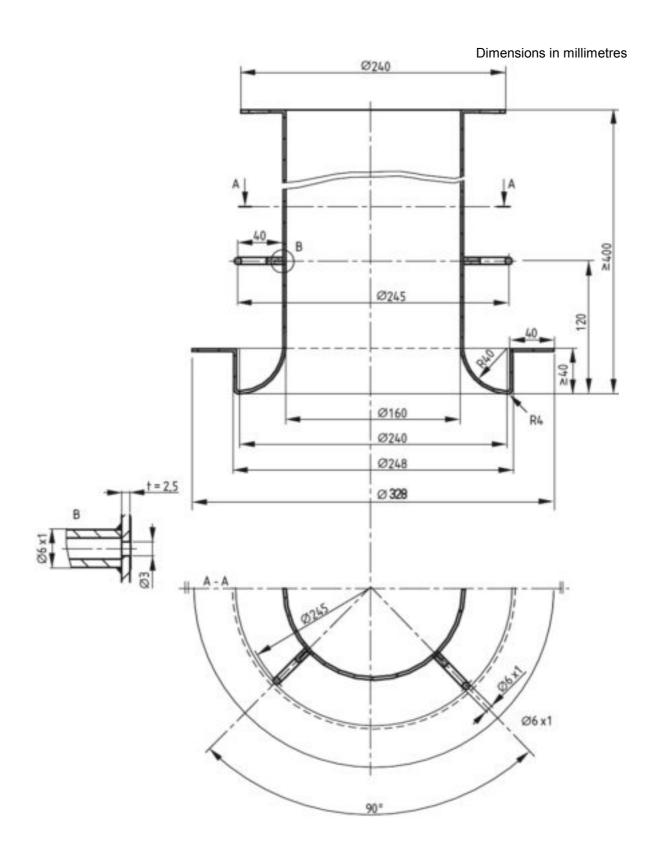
Inlet nozzle (stainless steel, t=2,5 mm)
